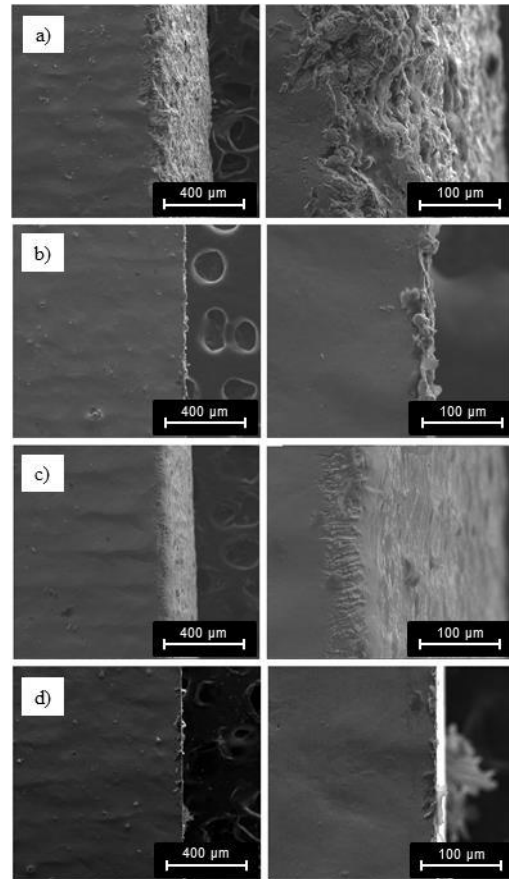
SEM (X800) images of ZrB₂ coated samples after the cutting process; a) Laser beam b) Abrasive water jet, c) Wire – cut electrical discharge machining, d) Abrasive disc
